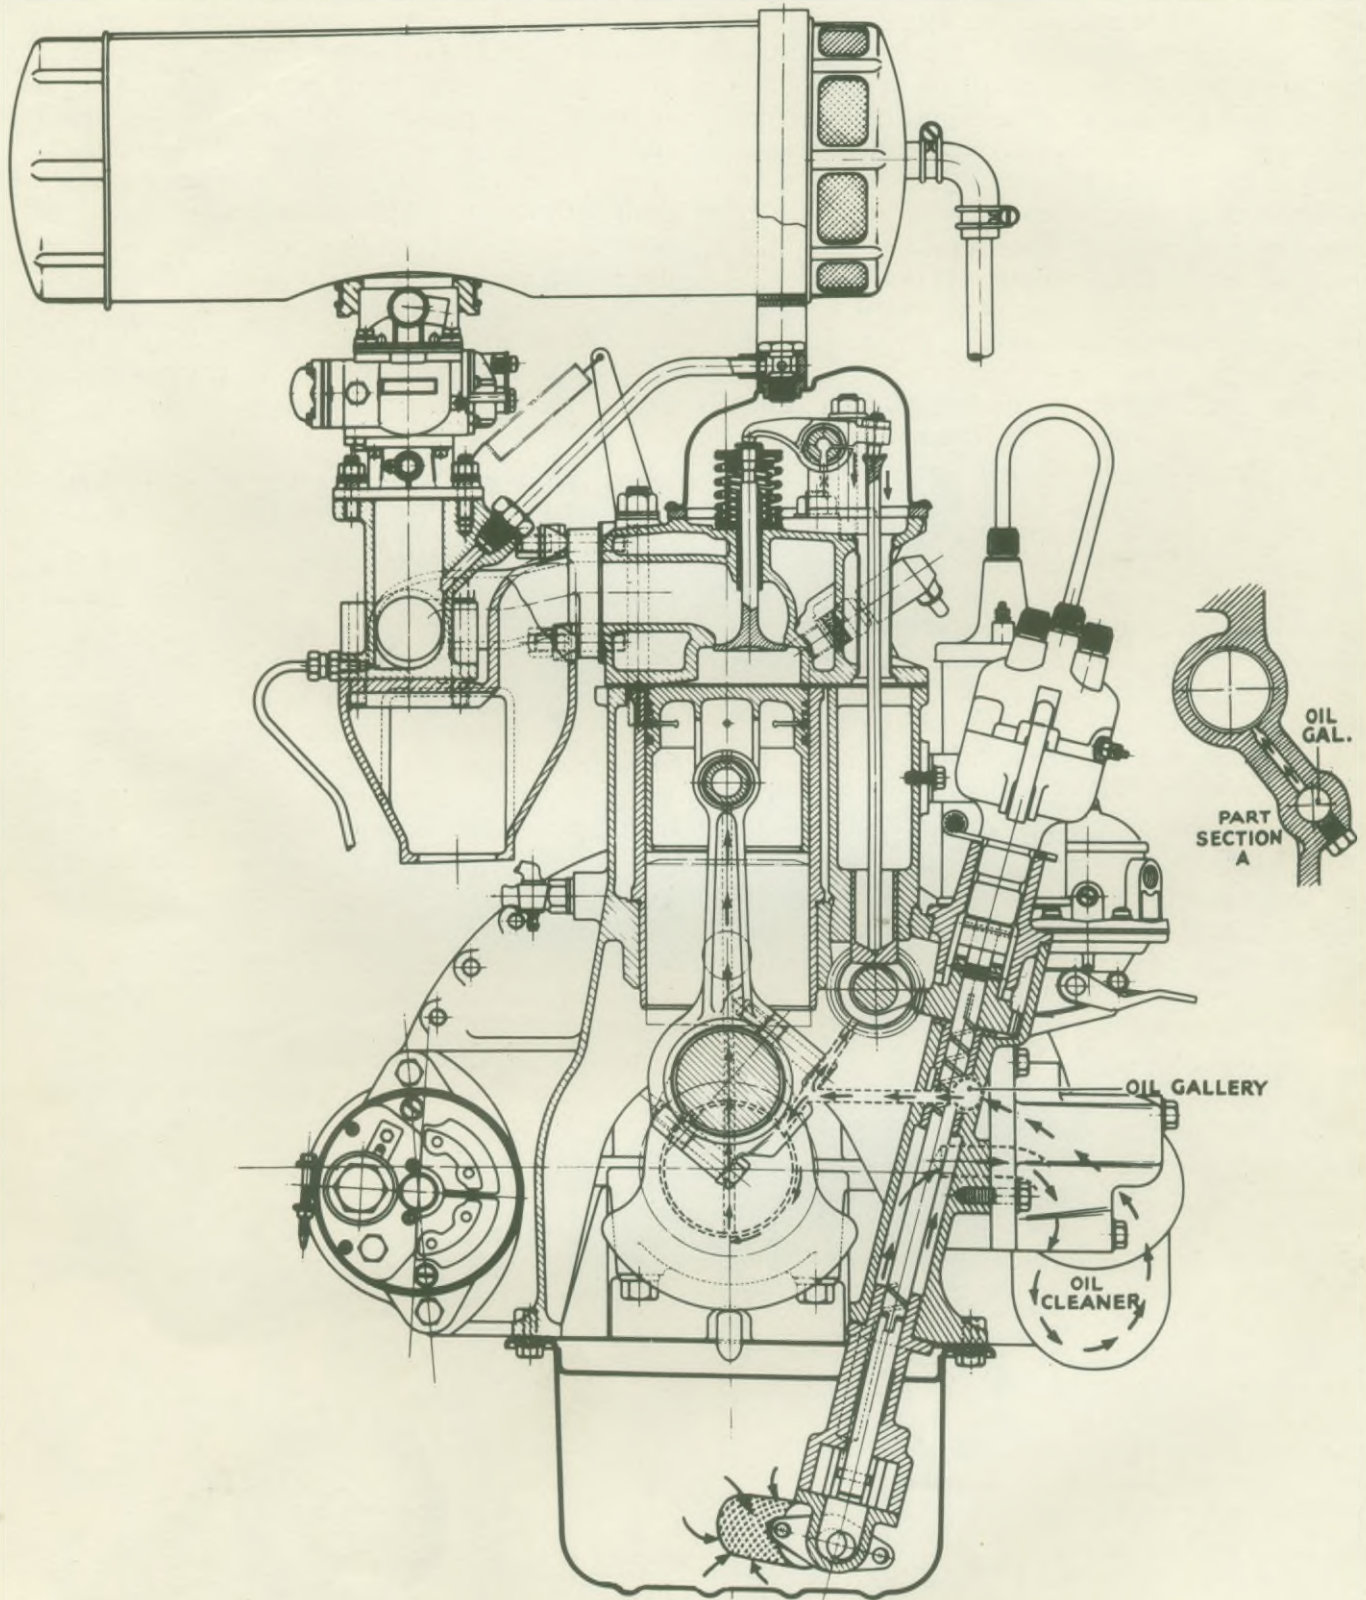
End view showing oil circulation and Part "A" Section of oil feed to camshaft intermediate bearing
